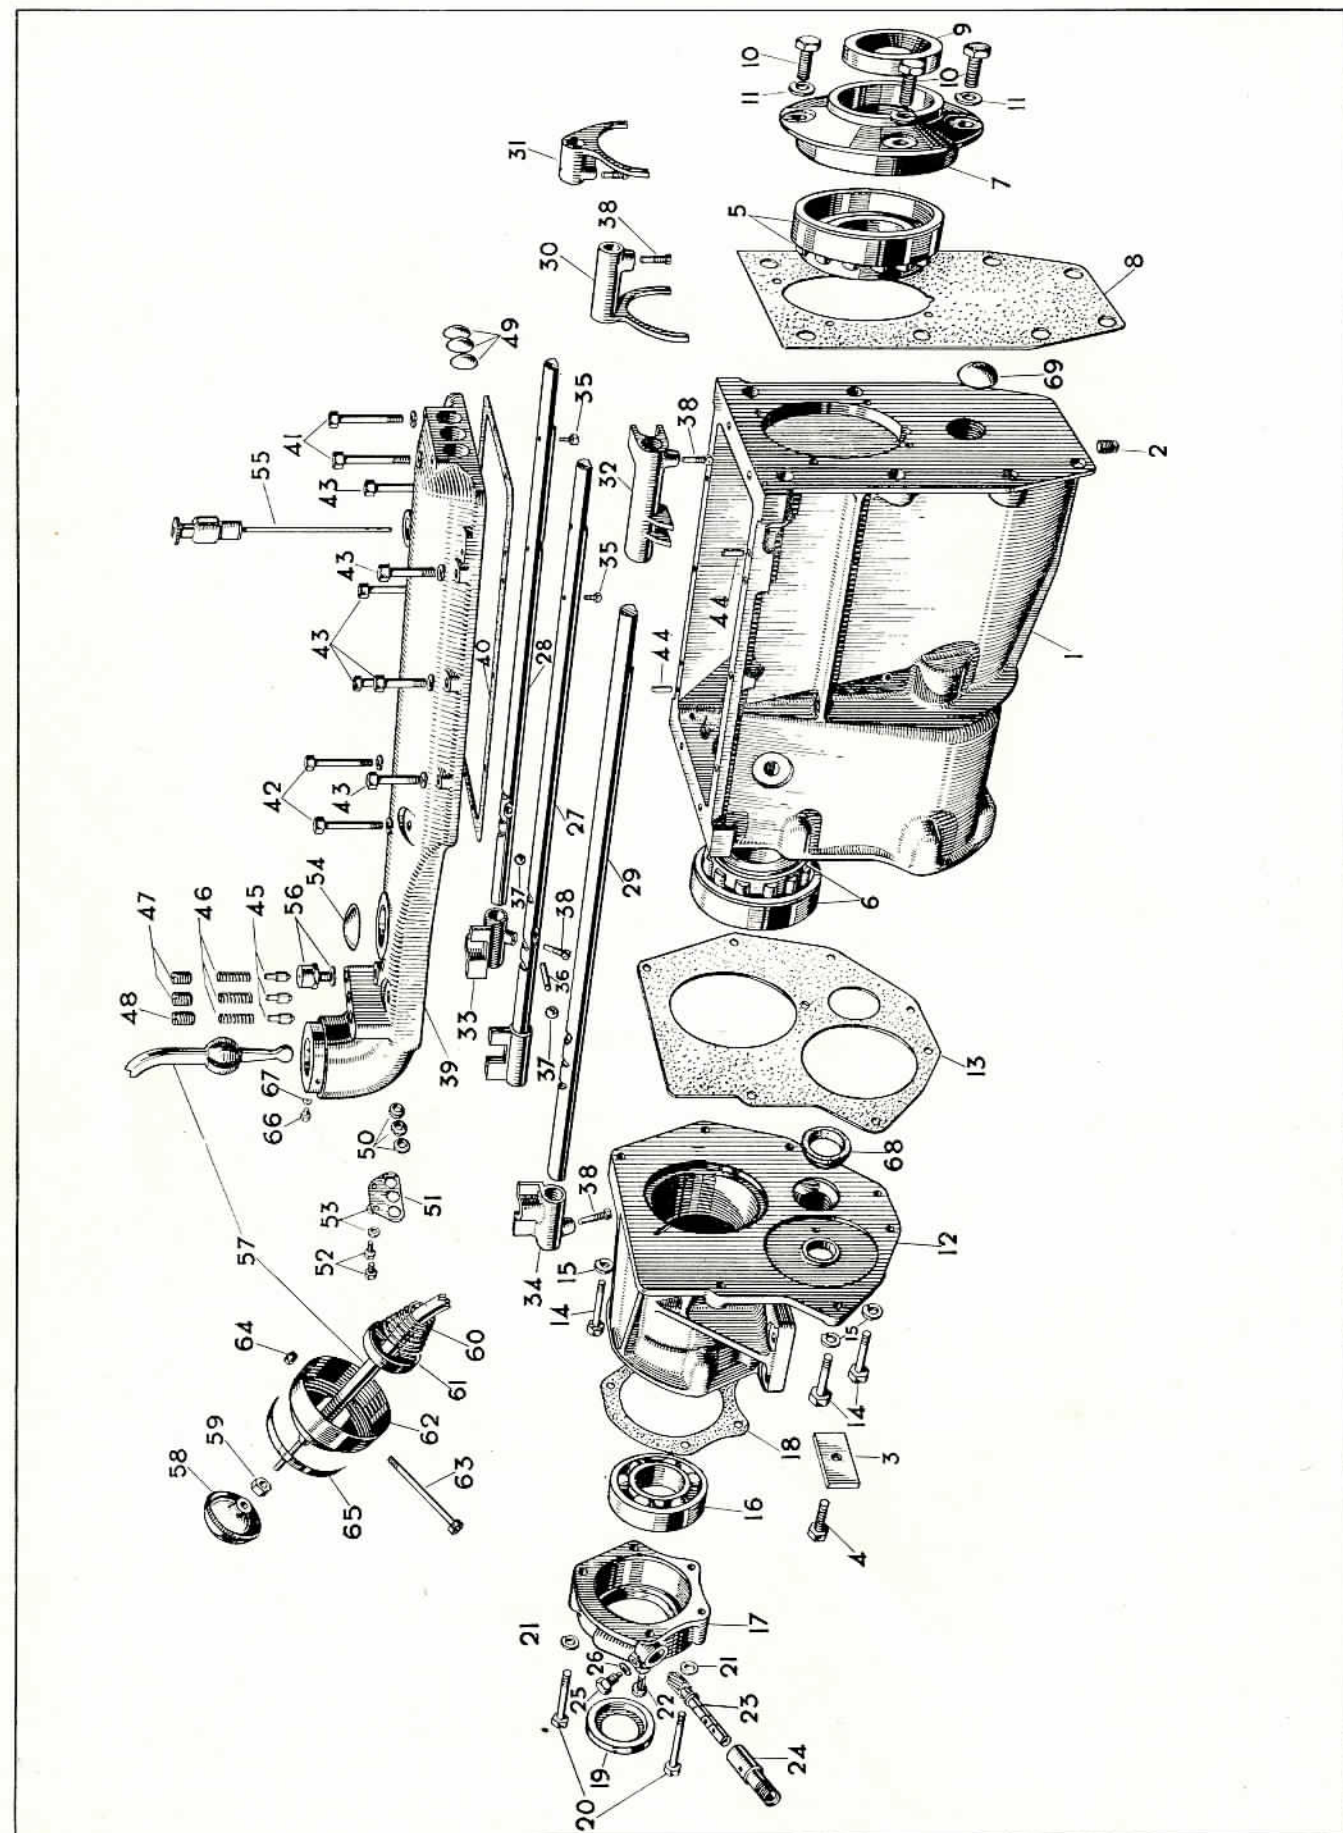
2 1/2 AND 3 1/2 LITRE DOUBLE HELICAL GEARBOX. CASE AND REMOTE CONTROL.
